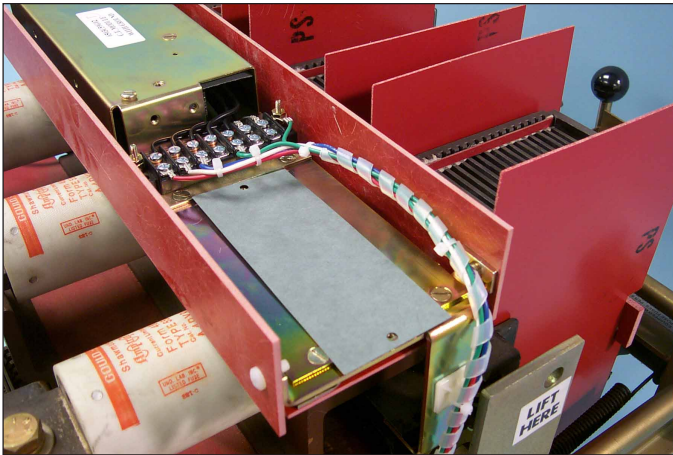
PT Module and Insulation Barrier Mounted to the Aux. CT Module Mounting Platform.
